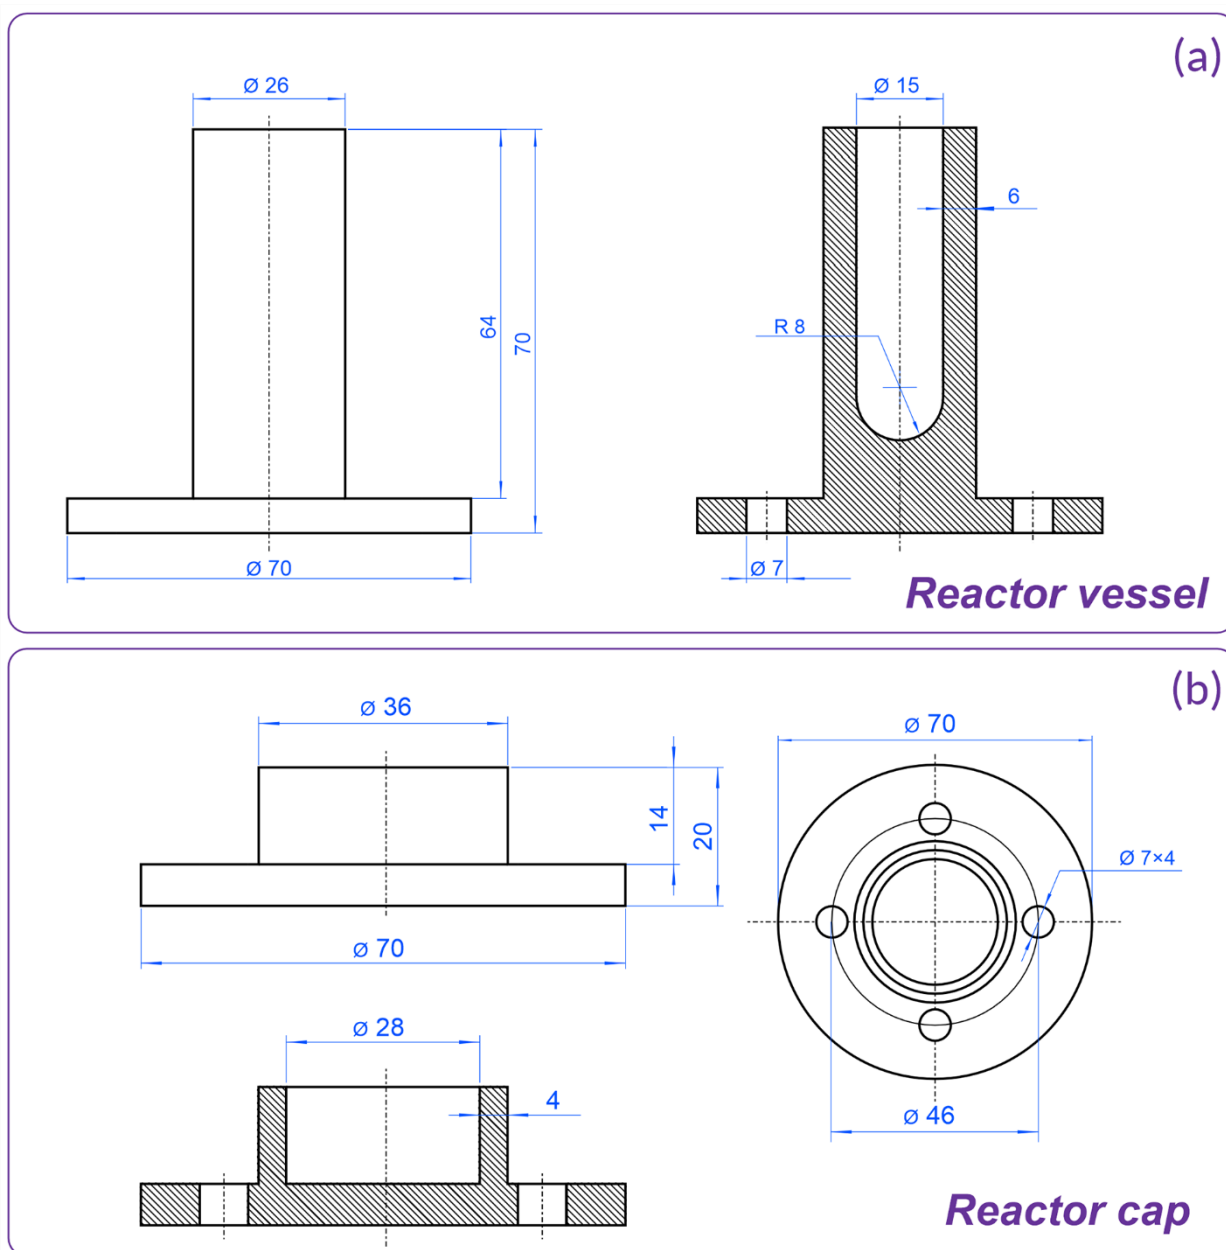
(a) Drawing of the I-tube type 4 reactor vessel; (b) drawing of the reactor cap.
